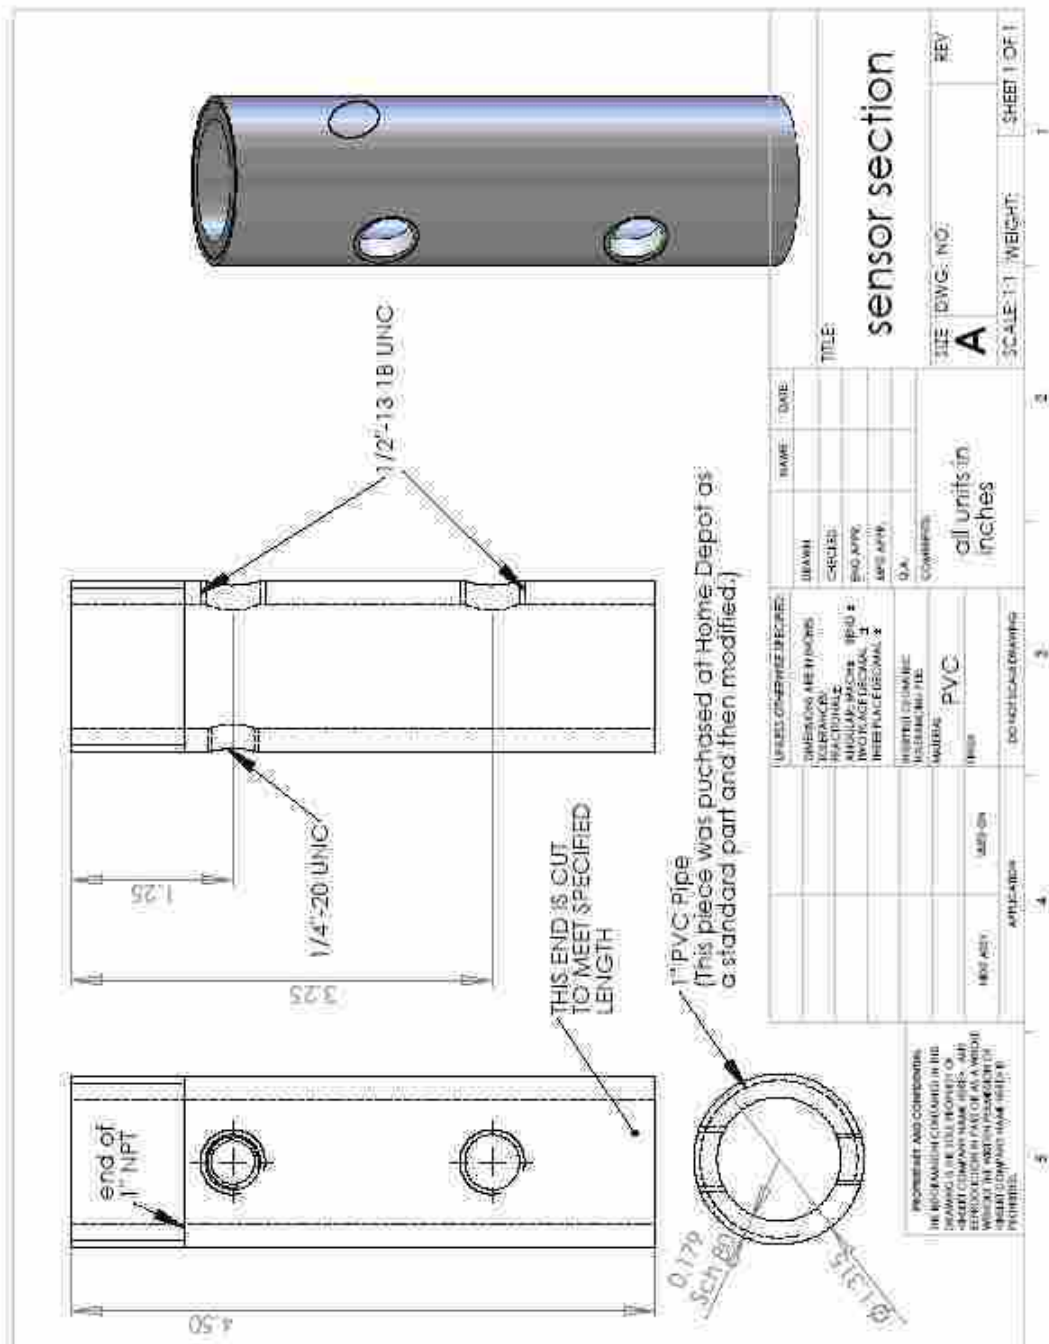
Drawing of cylindrical sub-glottal duct used in Test Fixture B.
